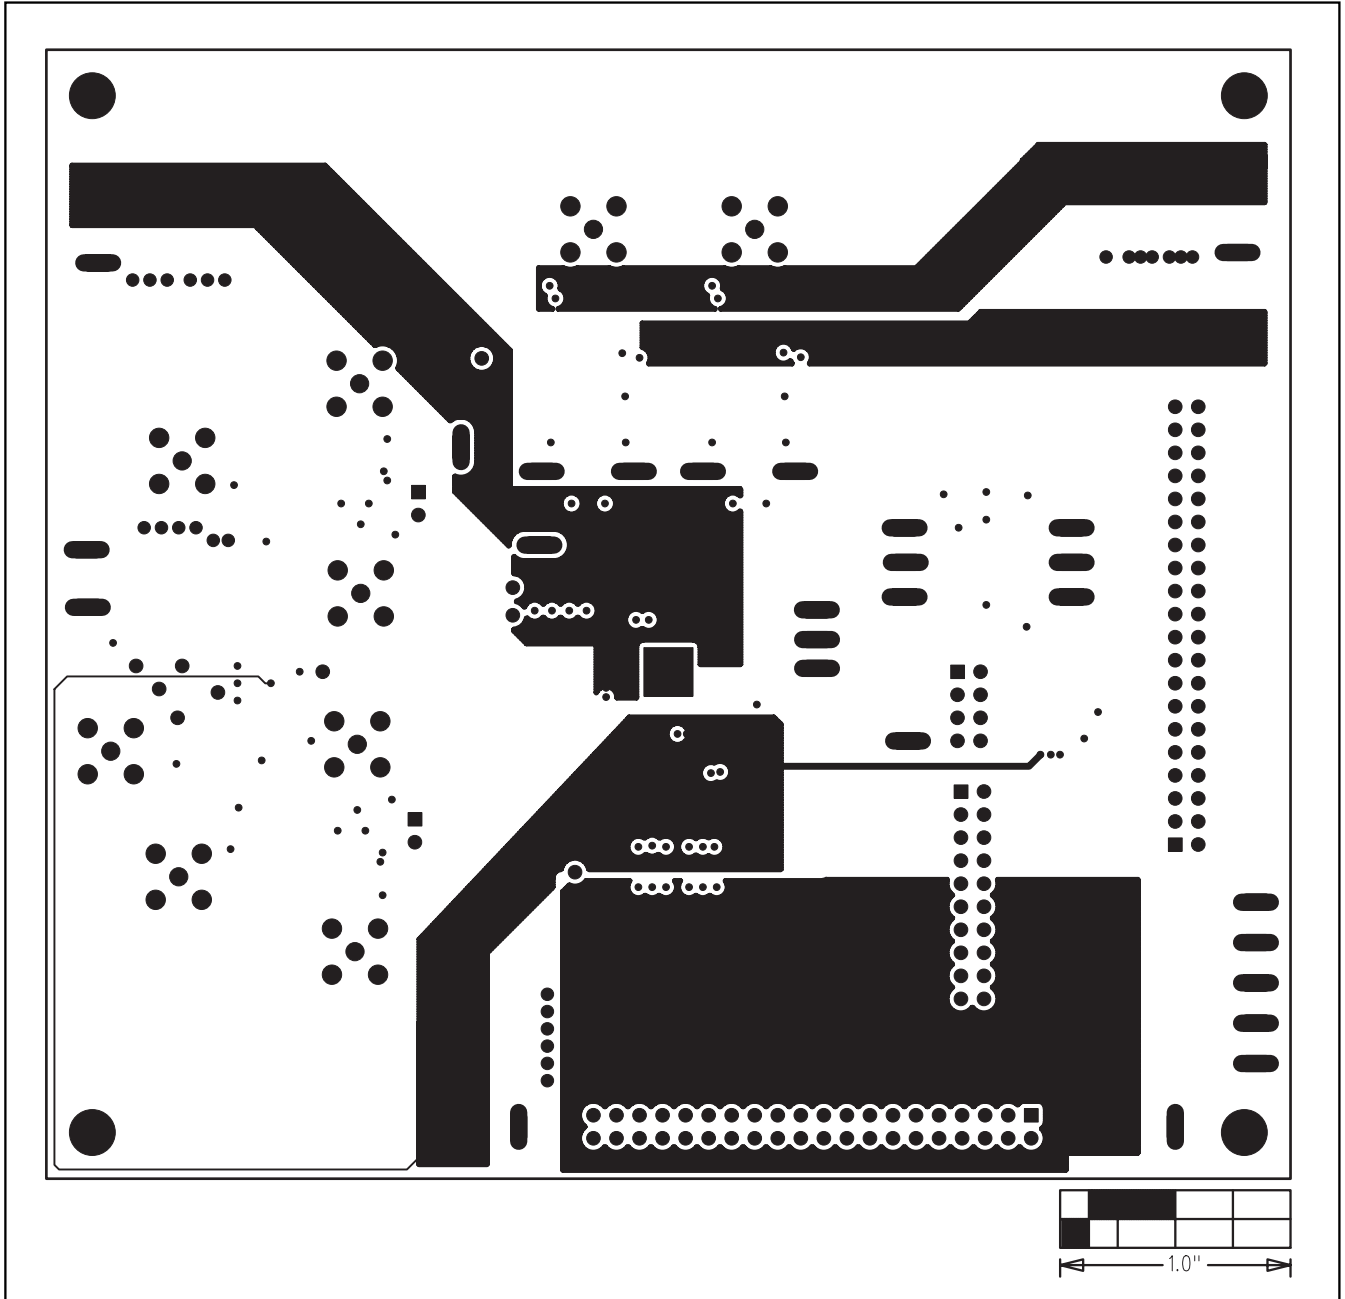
MAX19710-MAX19713 EV Kit PCB Layout (Inner Layer 3)—Power Planes
